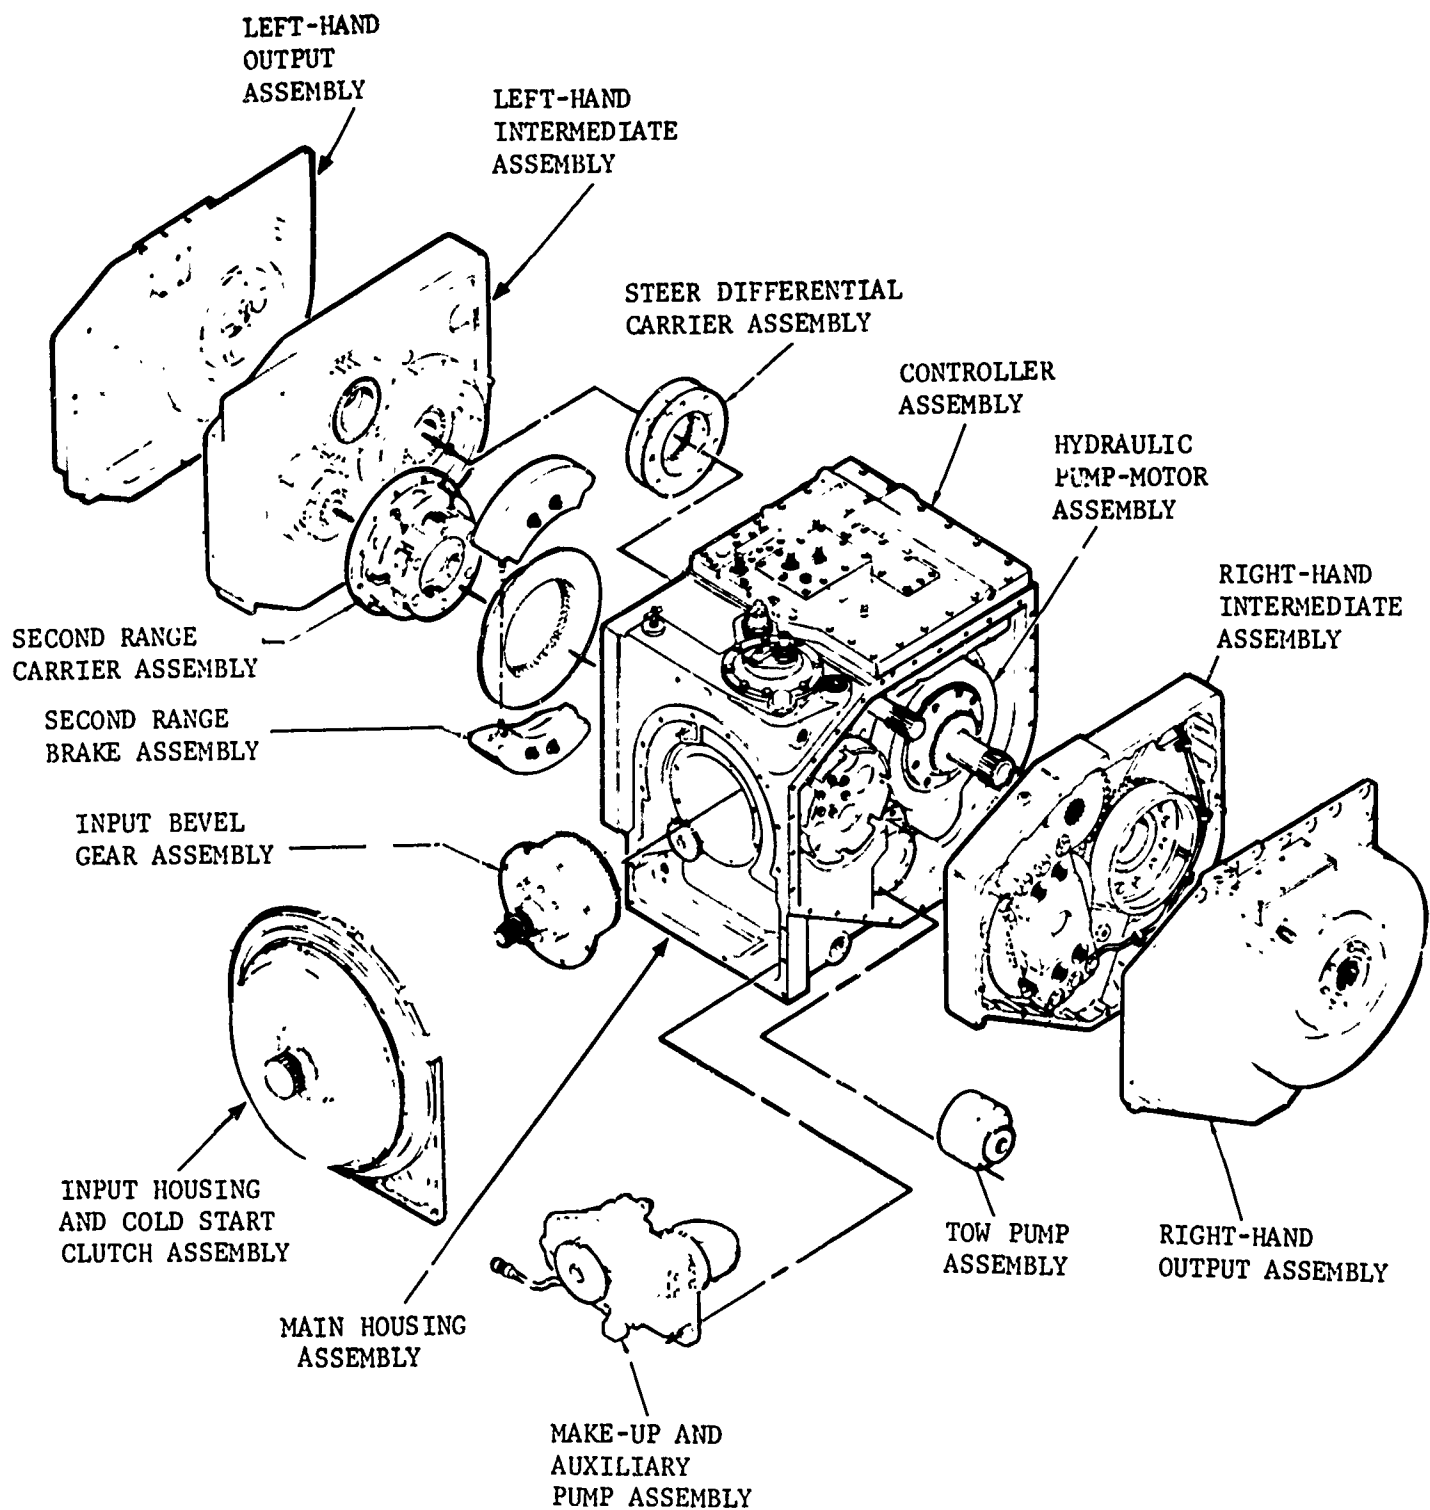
HMPT-500 Major Castings (subassemblies)
